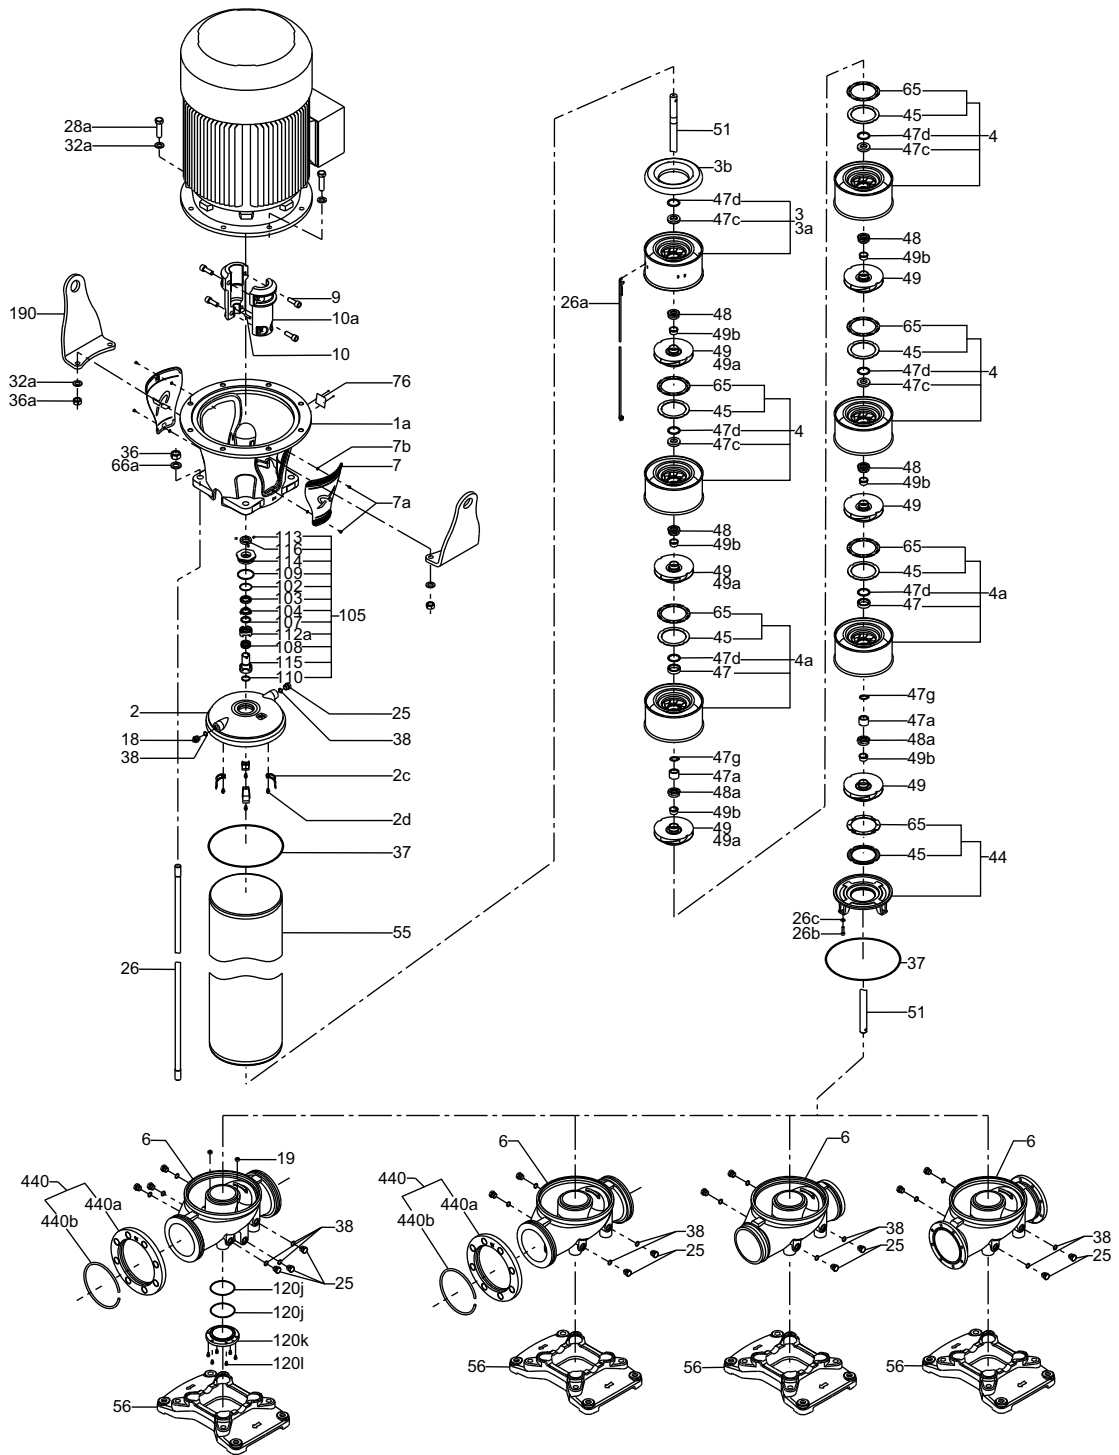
Exploded view of CR, CRN pump with Ø28 or Ø36 shaft and without thrust-handling device
